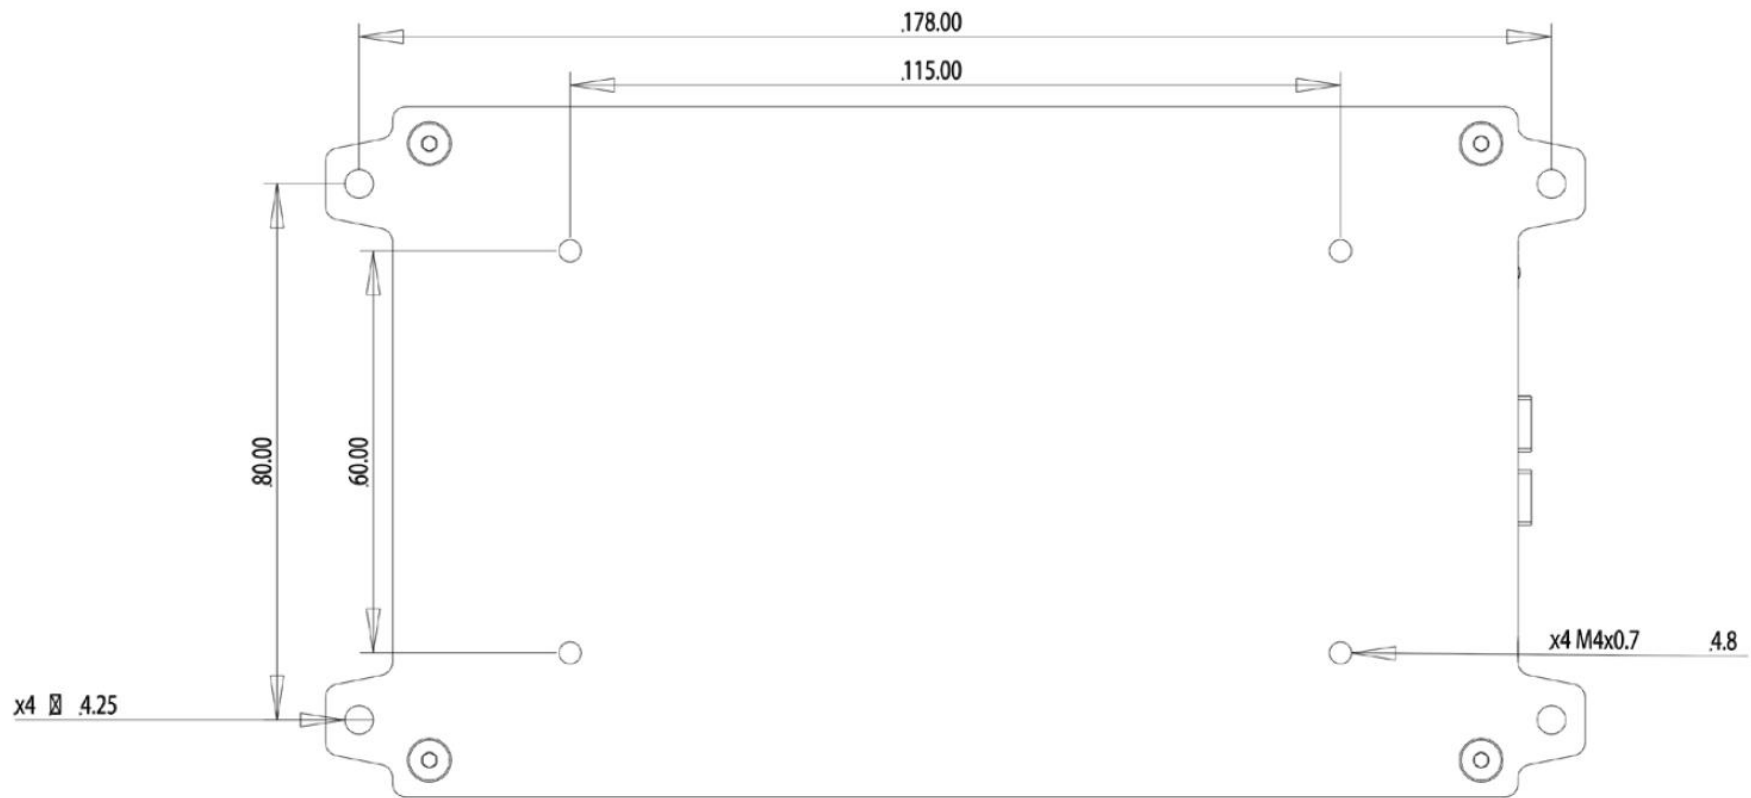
Footprint and Mounting Hole Pattern for Casia Module
